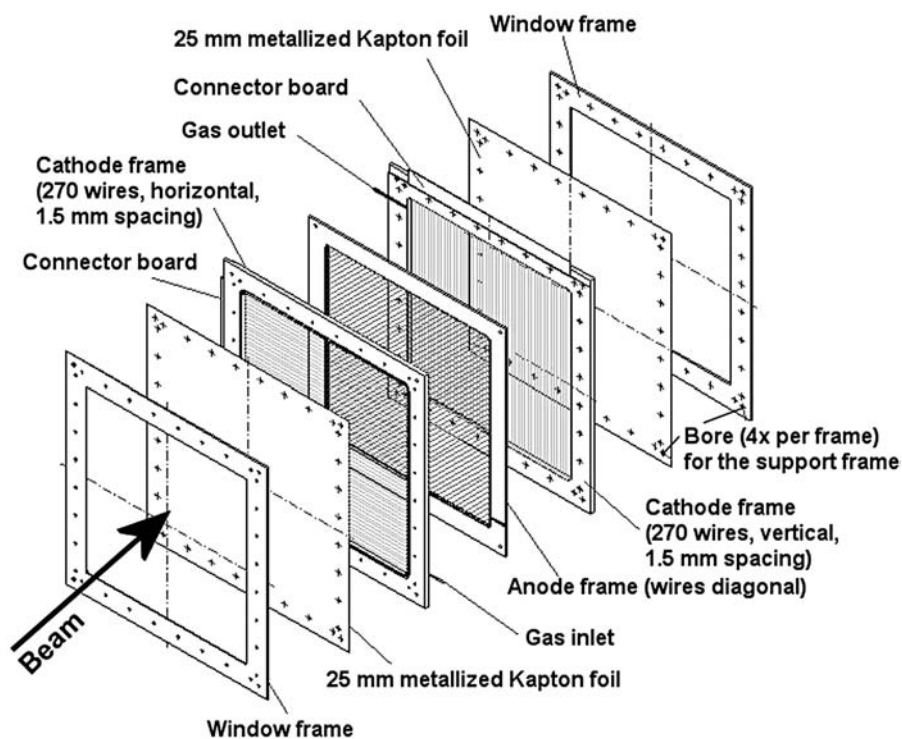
Exploded view of a large MWPC [33,187] for beam profile measurements outside a vacuum system
